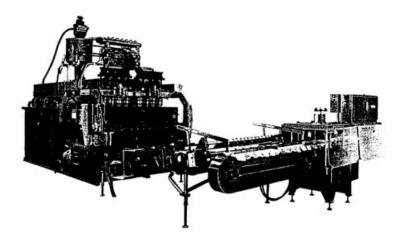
Uniloy 350R2 8-head intermittent extrusion blow molder for the manufacture of 2-L (0.5-gal) milk bottles with handles. Production rates of over 65 bottles/min have been achieved; also shown is the flash trimmer. Courtesy of Hoover Universal, Inc..
